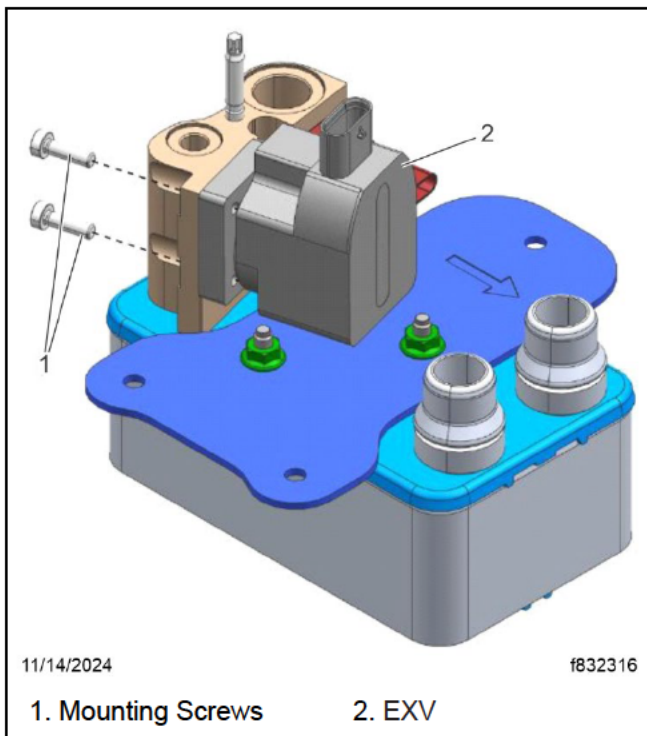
, EXV Mounting on the Chiller with Old Bracket
